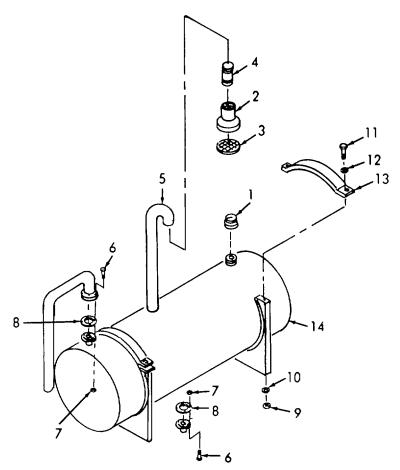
Fuel Oil Tank, Removal/Installation.
